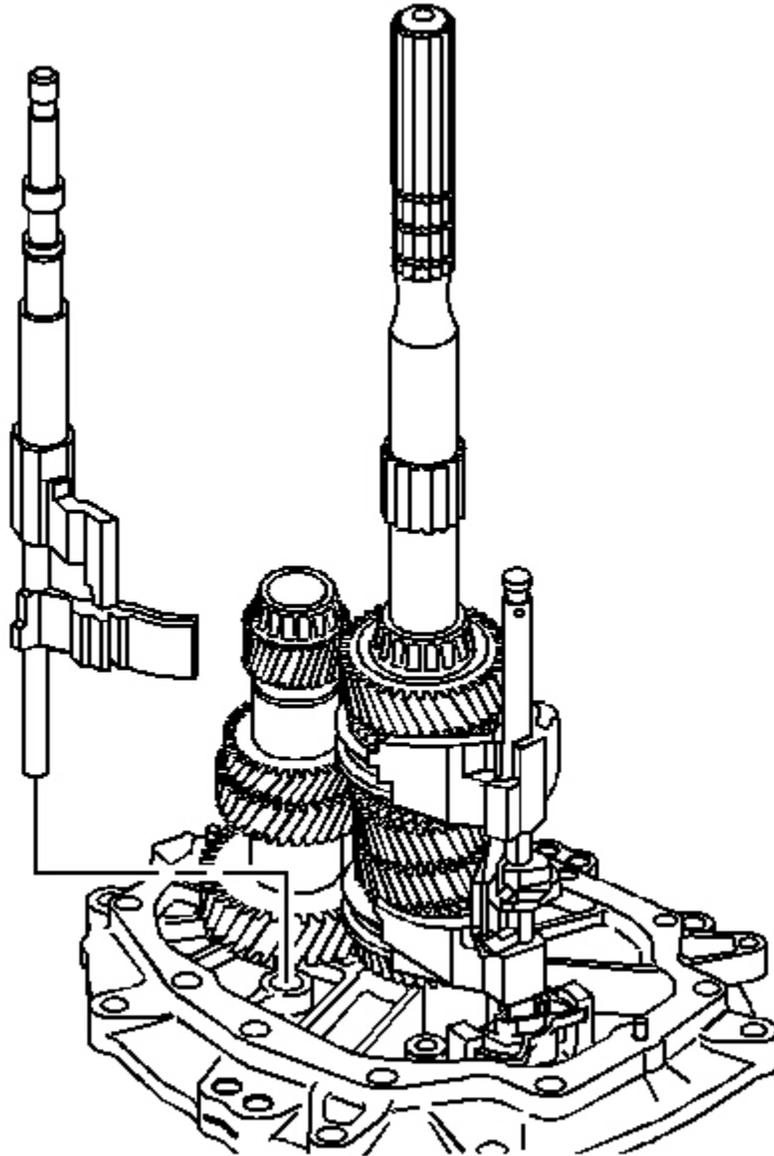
View Of 5th/6th & Reverse Shift Shaft
